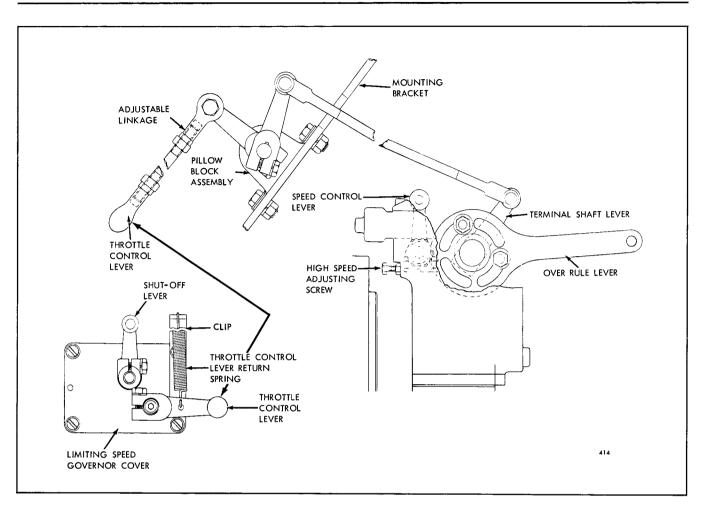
Output Shaft Governor and Linkage for Units with Engine Mounted Air Cleaners
